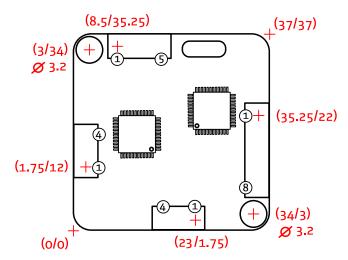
Board dimensions for hardware version V1.2, position of mounting holes, and position (pin 1) of connectors (all values in mm). The horizontal position of the motor connector is different. Not to scale.
